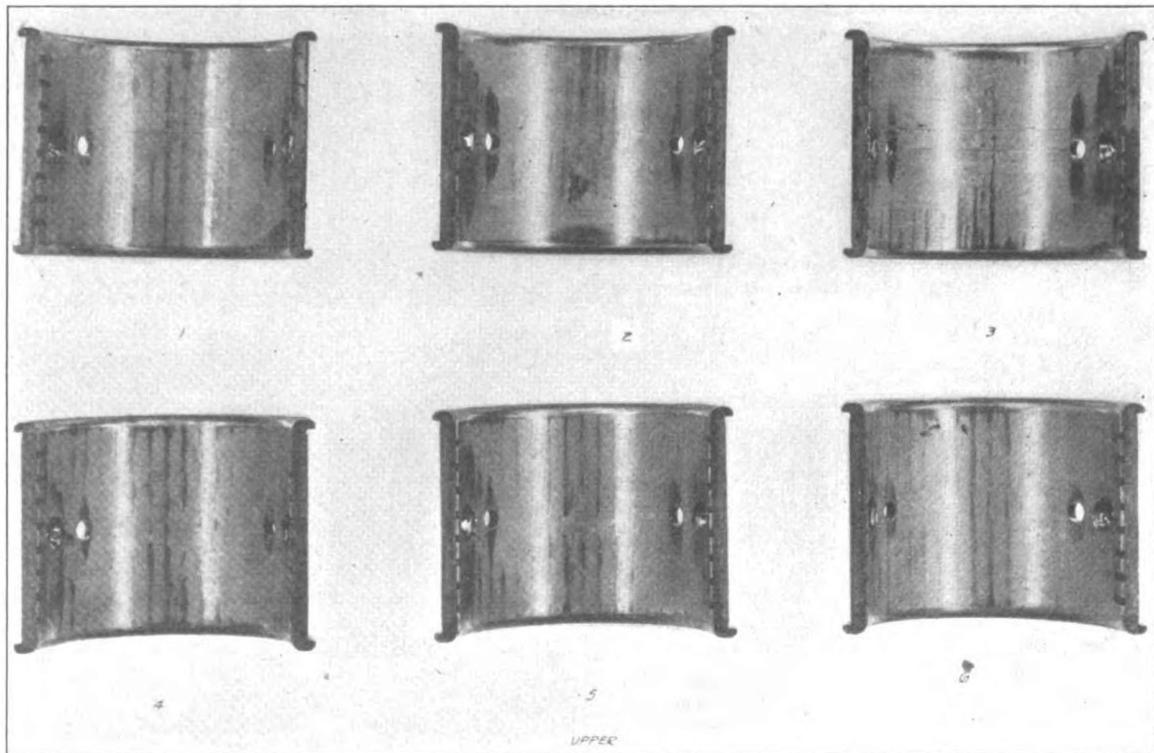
Upper connecting rod bearings after endurance run. Note original reamer marks made during assembly of engine.
